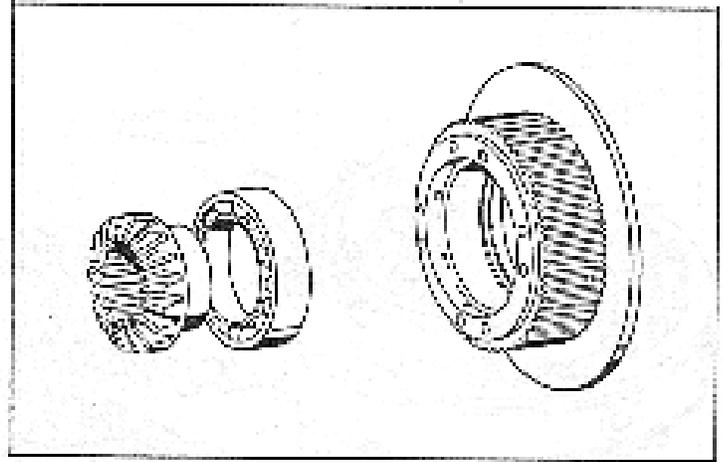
Clutch Flange, Roller Bearing and Bevel Gear.
